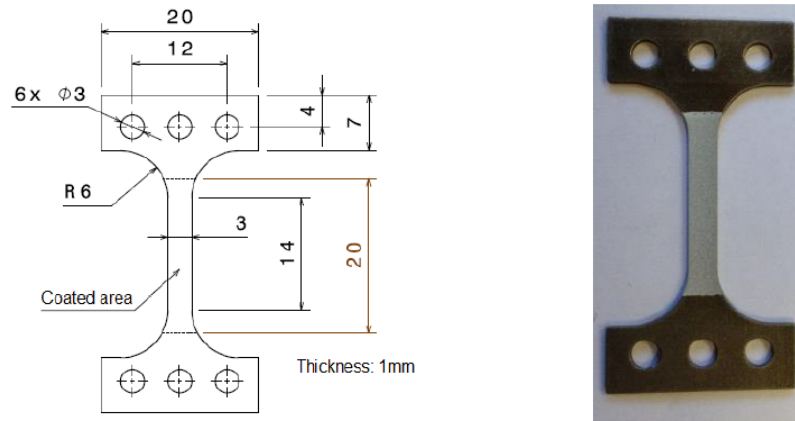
Drawing and dimensions of the tested samples (on the left). Photography of the coated sample (on the right).
